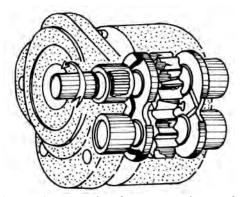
Example of compensation surface housed in housed in a bearing bushing a bearing bushing and bedding in a cover
